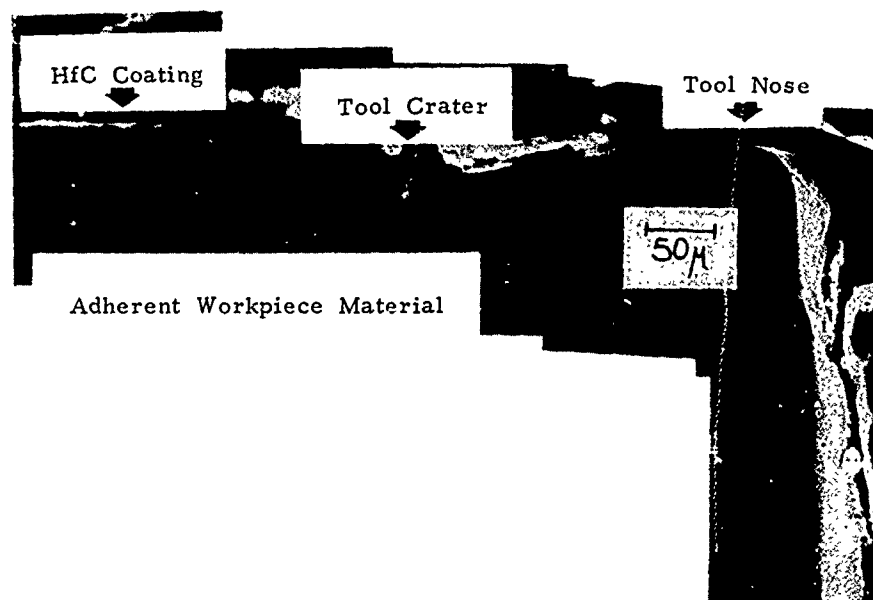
Section through the crater of a hafnium carbide-coated insert showing adhesion of workpiece material near the maximum wear point.
